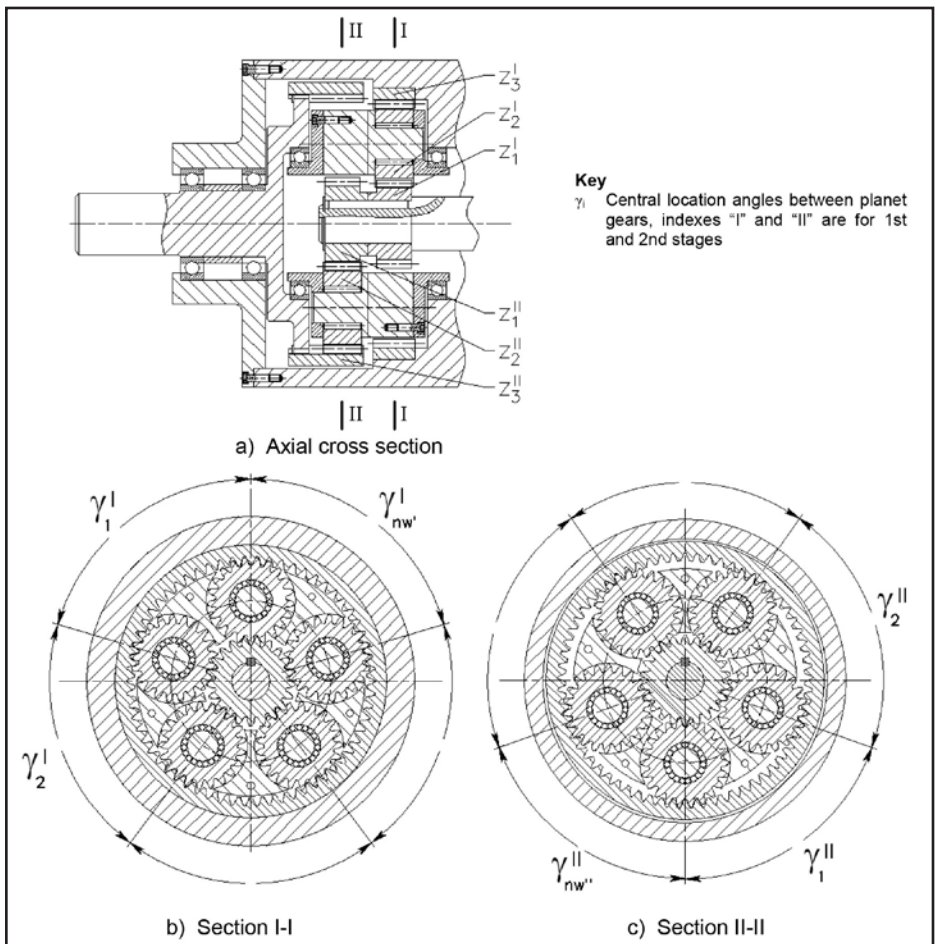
Two-stage planetary gearbox (arrangement A) with connected sun gears of first and second stages and compound cage.
